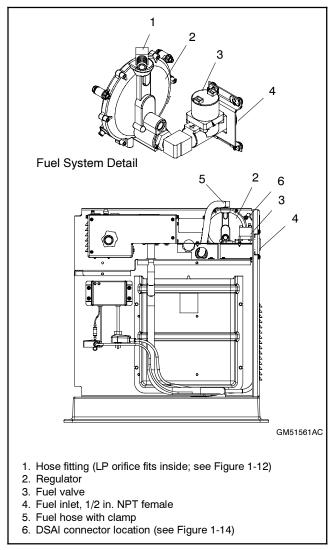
Fuel System Components, Air Inlet Side, 18RESL Shown
